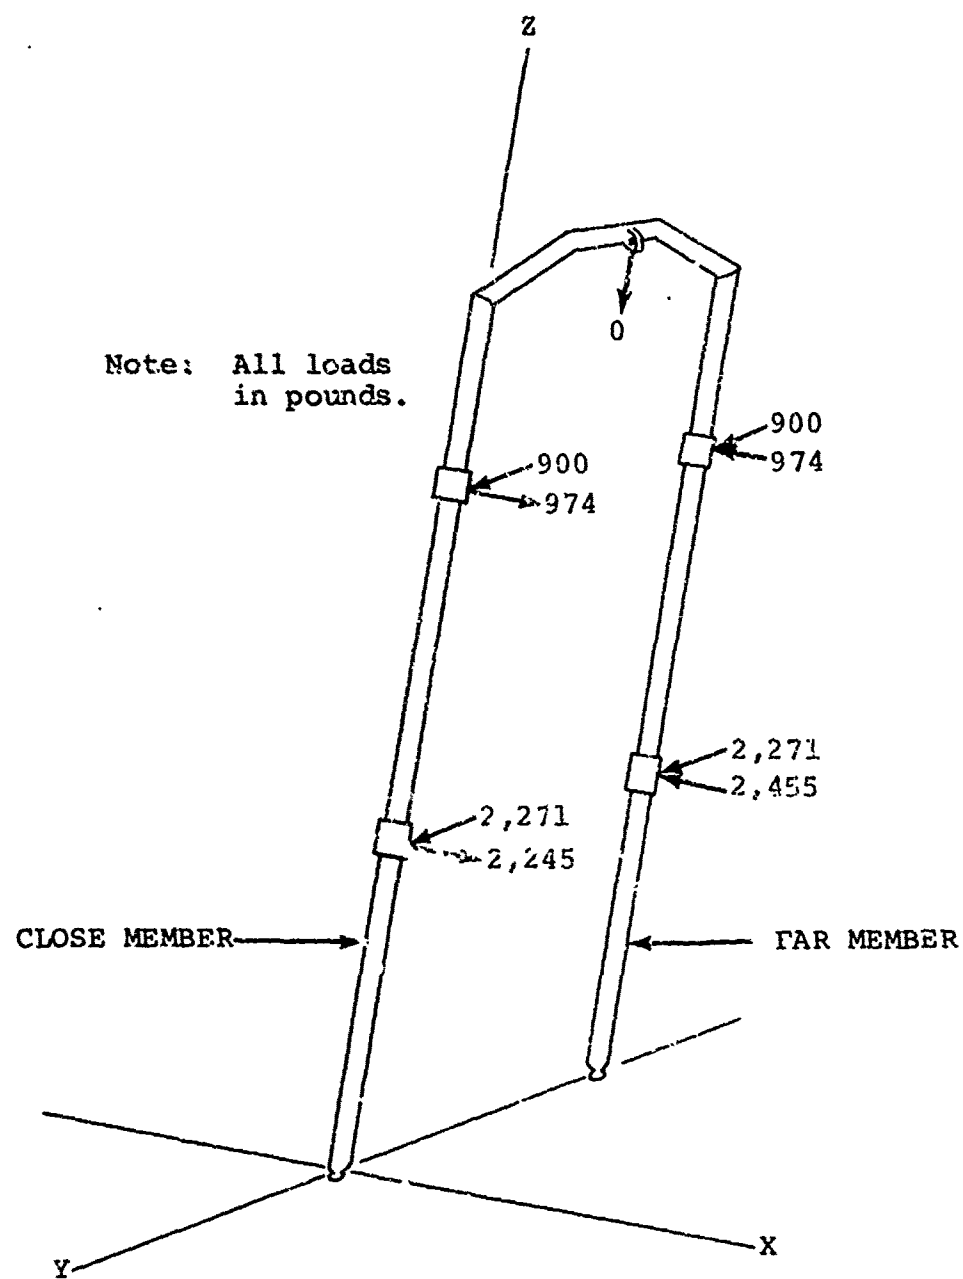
Applied Loading of Guide Frame Assembly - Lateral Loading.
